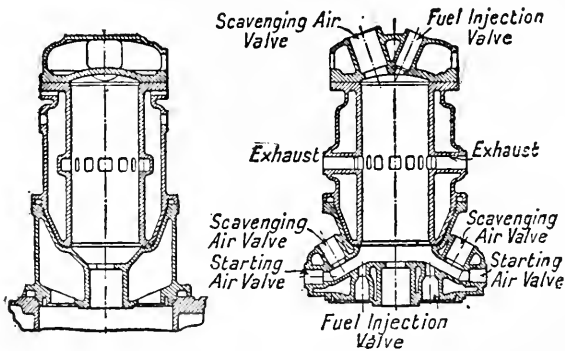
Cylinder and Heads of Double-acting Engine.
